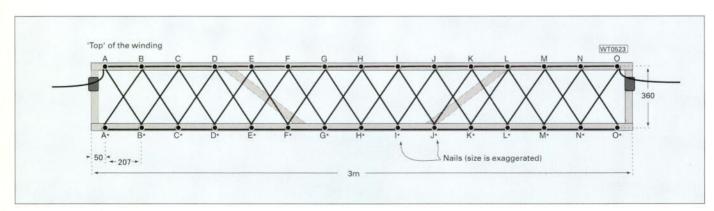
The winding detail (shown 'exploded' for clarity) of one section of the loading coil. There are 11 sections like this and three with one extra winding on each section.
